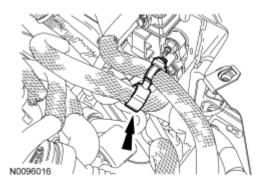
Locating Coolant Vent Hose Retaining Clip Of A/C Tube Courtesy of FORD MOTOR CO.
